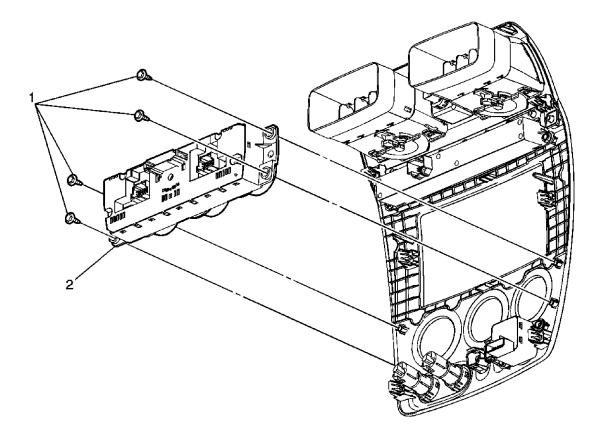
HVAC Control Assembly Replacement Courtesy of GENERAL MOTORS CORP.
